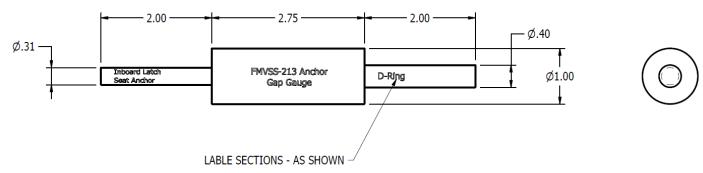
BELT ANCHORAGE GAP GAUGE (in.)
